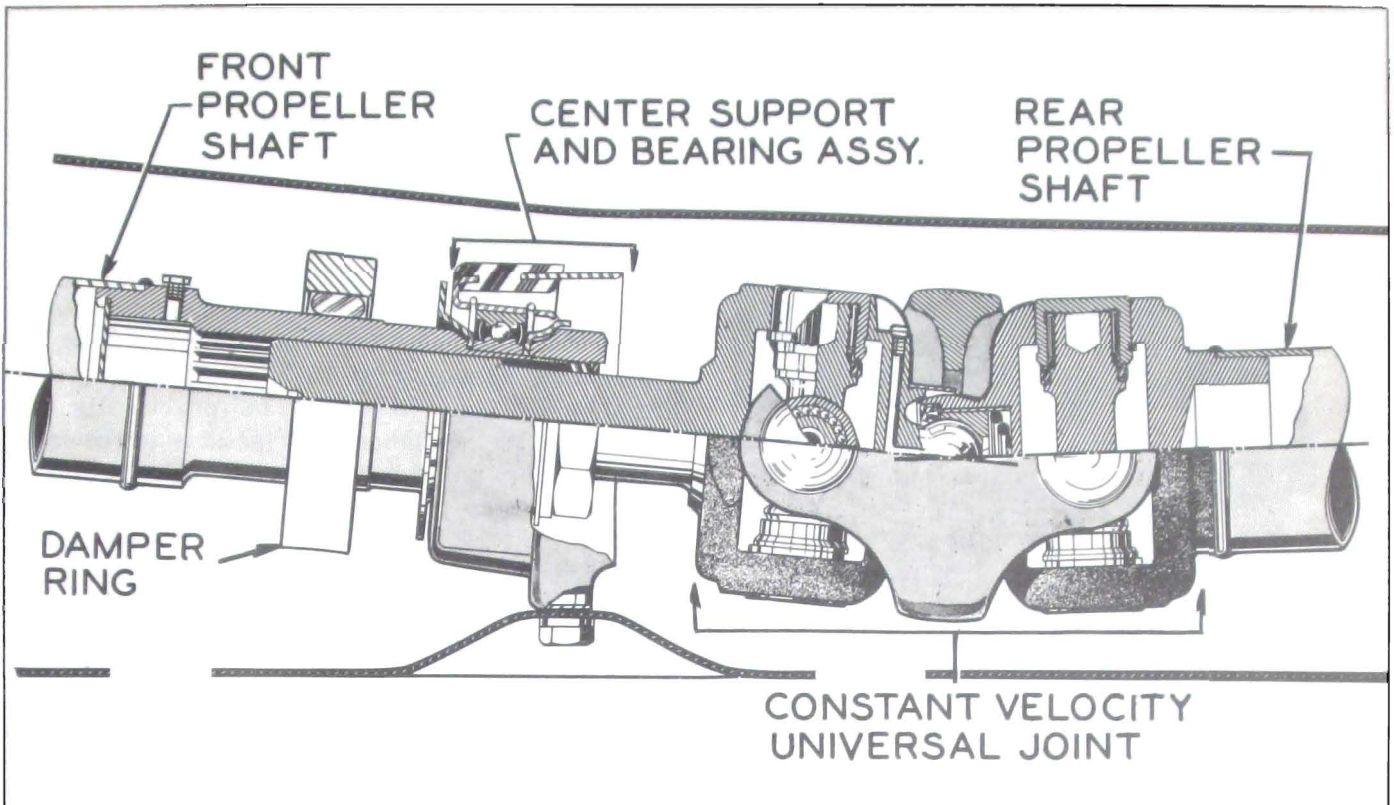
Center Support, Bearing, and Constant Velocity Joint
